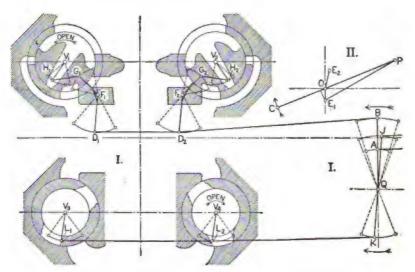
Outline of Fleming Four-valve Gear, for 16"×16" Engine. Scale 1 to 14, 1 to 7.
